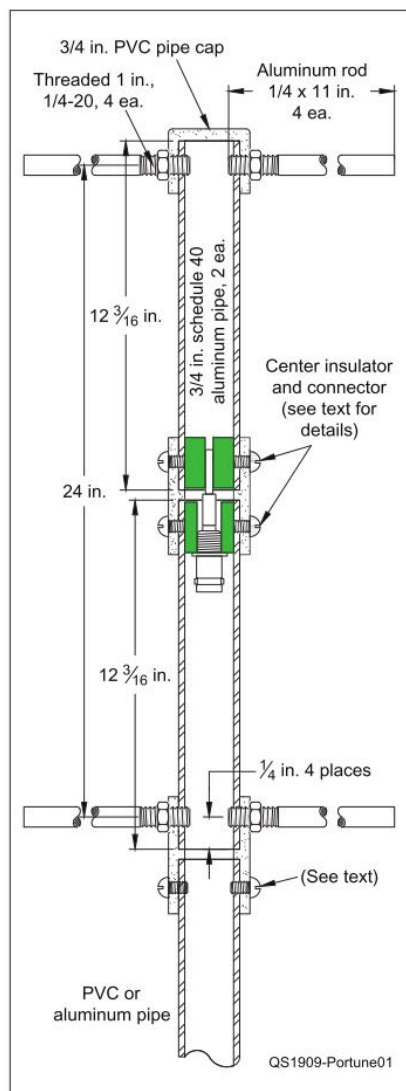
Mechanical drawing of the rugged 2-meter antenna.
